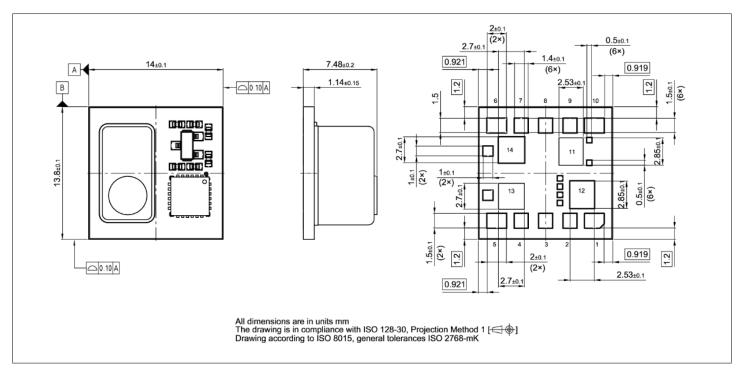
Package outline (top, side, and bottom view of LG-MLGA-14-1)
